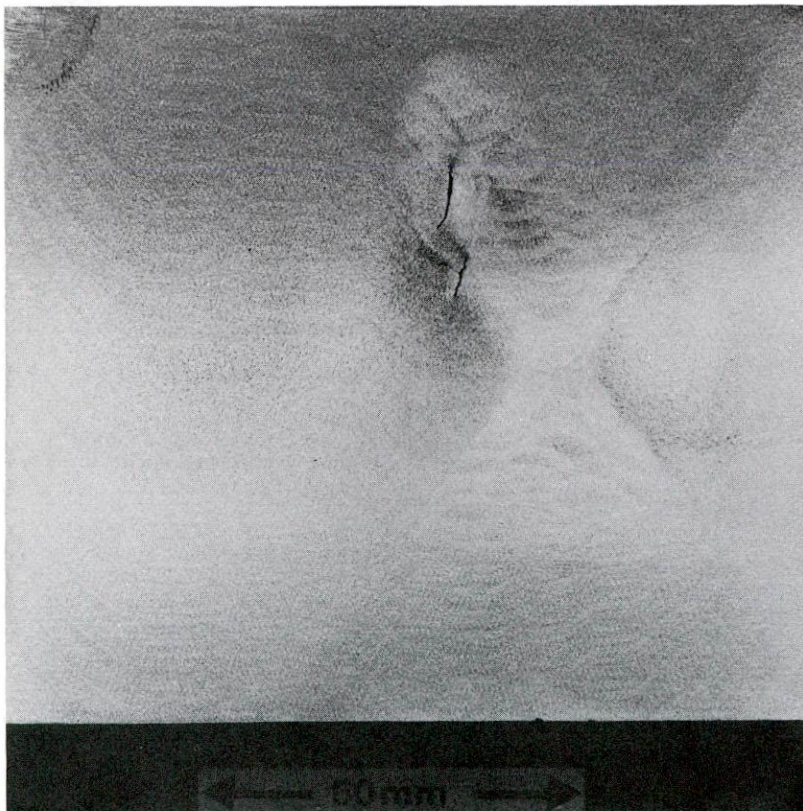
Macrosection of solidification cracks, defect 1. (Enhanced by magnetic particle inspection.)
